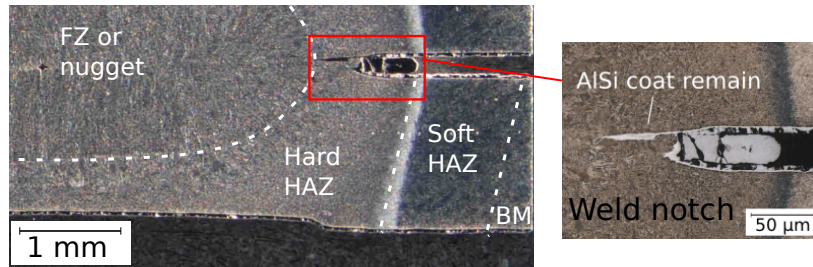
Scheme of the 22MnB5 spot weld zones. On the right, zoom of the irregular weld notch.
